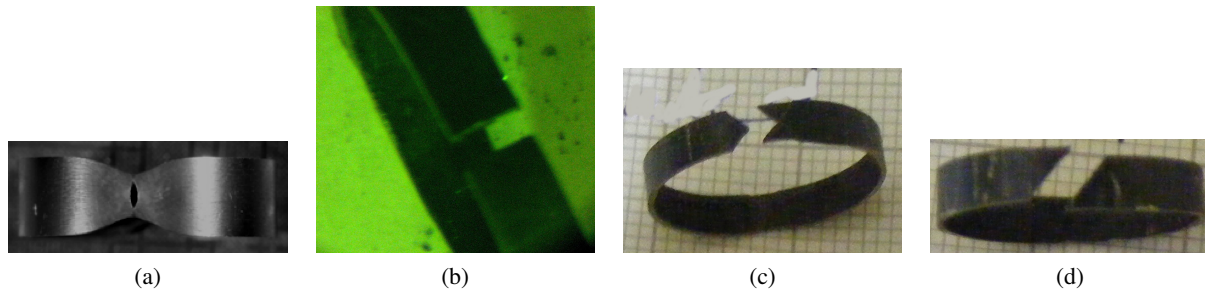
The photographs of the ambient temperature tested ring specimens for (a) as-fabricated clad, (b) defective low burnup fuel clad, (c) high burnup pin type-I, and (d) high burnup clad type-II.
